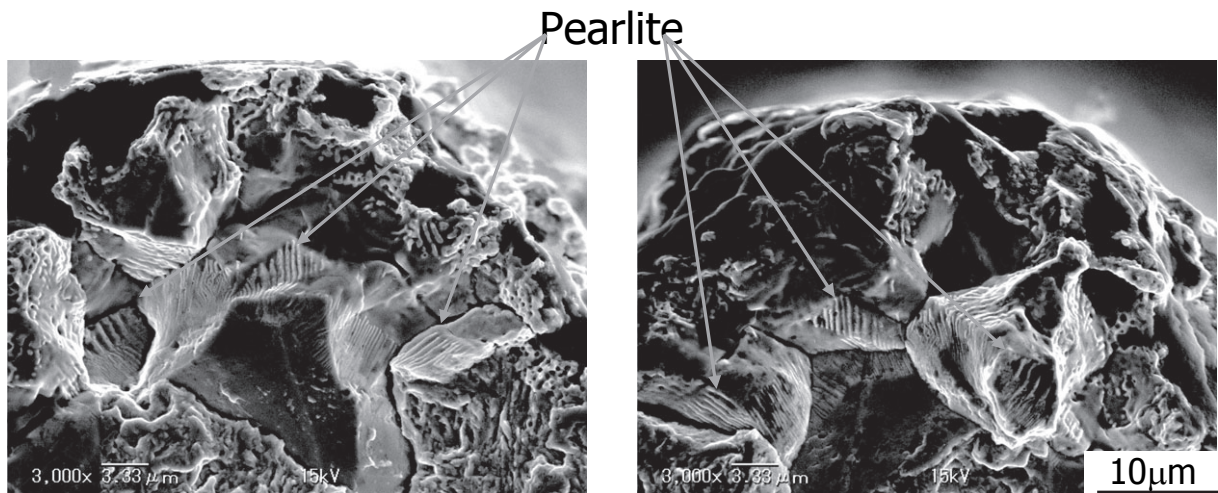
SEM images for each side of fracture surface of atmosphere-carburized 90° edge specimens.
